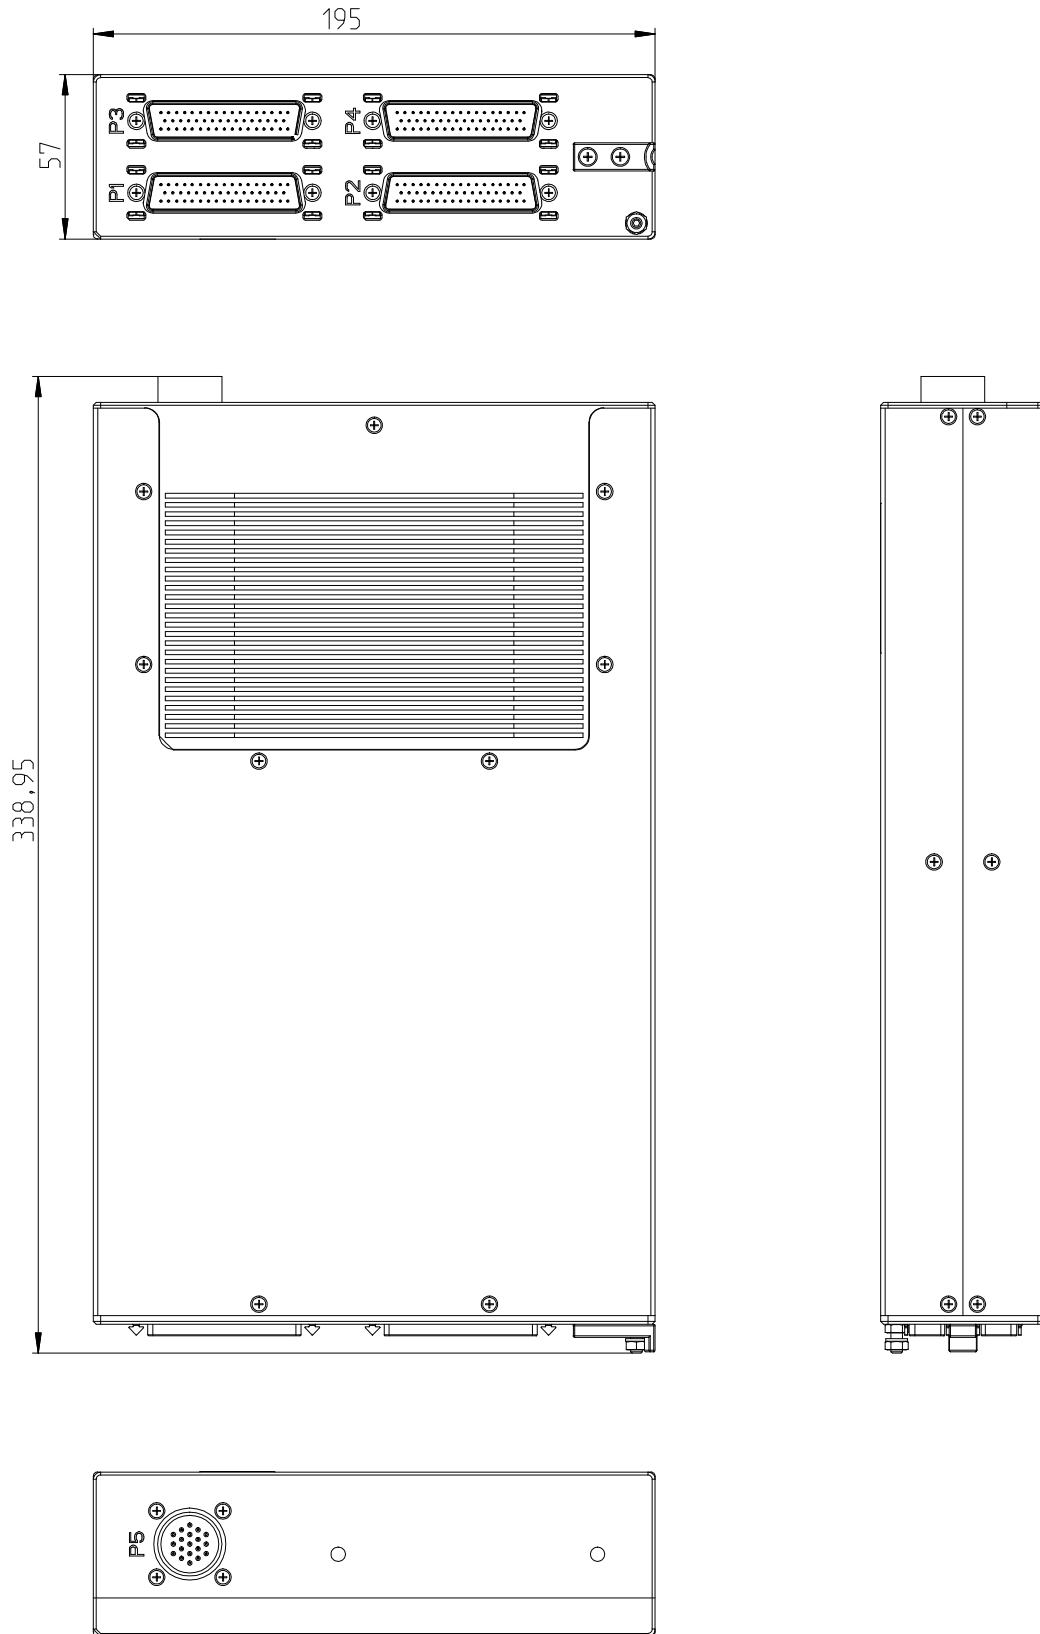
Installation dimensions REU 5100-(x)-(xxx) (measures in mm)
